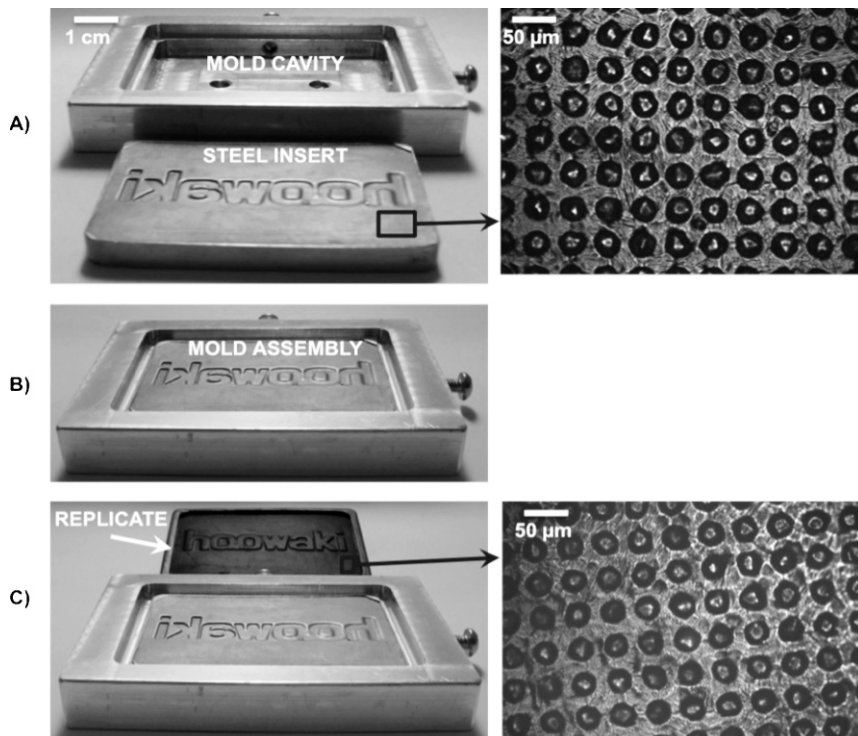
Production of microstructured superhydrophobic molded parts using microstructured steel mold inserts - A) The process begins with a mold cavity and a microstructured steel insert. B) The steel insert is assembled with the mold cavity, and polymer is molded in the assembly. C) A polymer replicate results having microstructures from the steel insert. The microstructures shown here cause superhydrophobicity demonstrated in [Figure 2](#).
